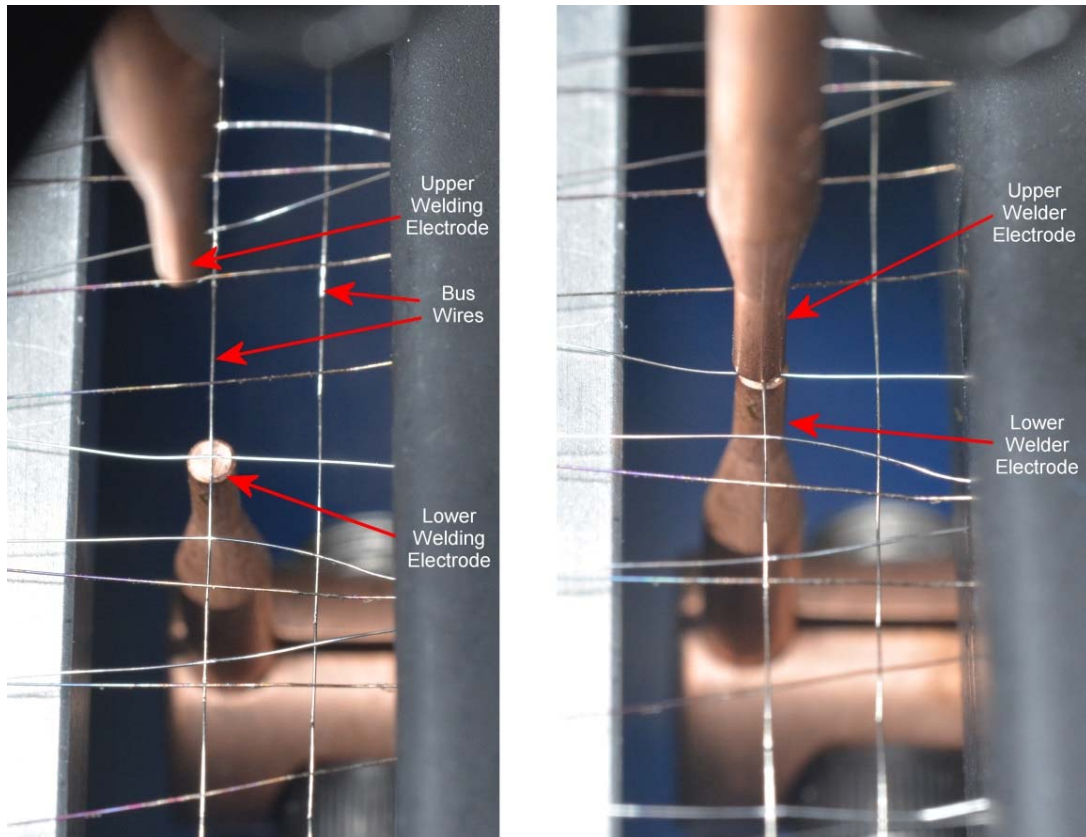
Photograph of the welder electrodes, both open and closed
